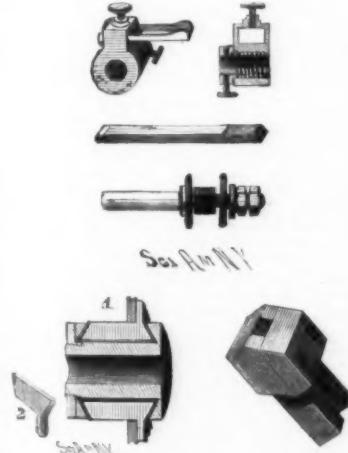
DETAILS OF THE BRUSH HOLDERS, THE COMMUTATOR CYLINDER, AND BRUSH-HOLDING JIG.
